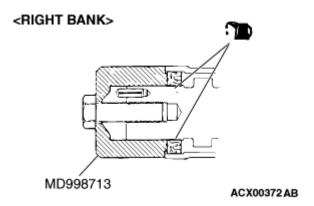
Pressing-Fit Camshaft Oil Seal Using Special Tools MD998713 (Right Bank)
